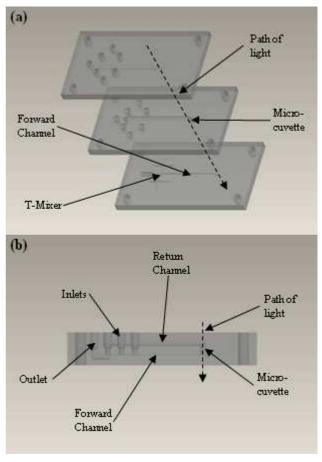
(a) Exploded view of the microfluidic chip. (b) Side view of fully assembled chip showing the micro-cuvette.
